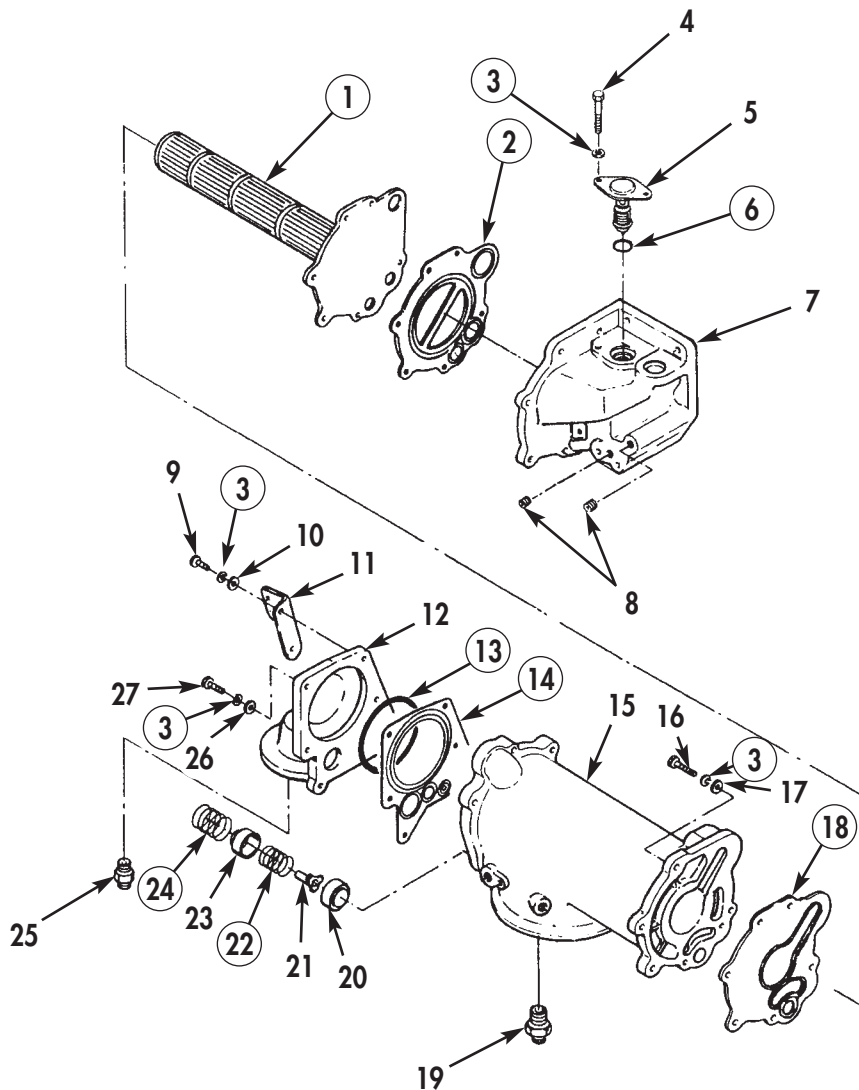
Oil Cooler Assembly—Big Cam III Engine.
